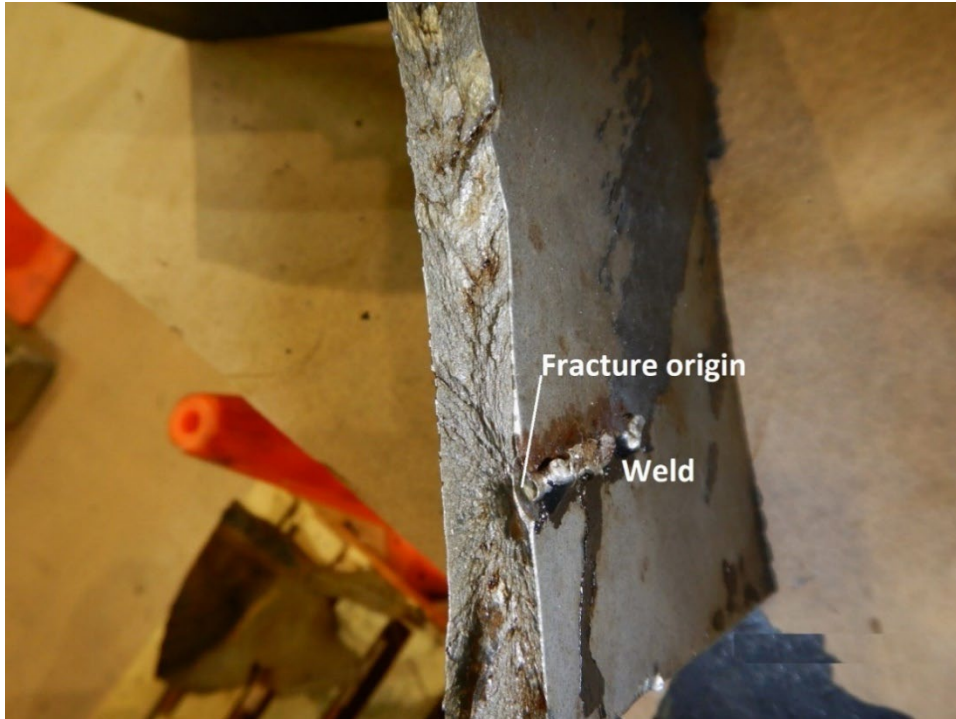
Location of the breach formed by a crack in the A-end stub sill tail piece extension of VMSX 281261. (Source: TSB)
